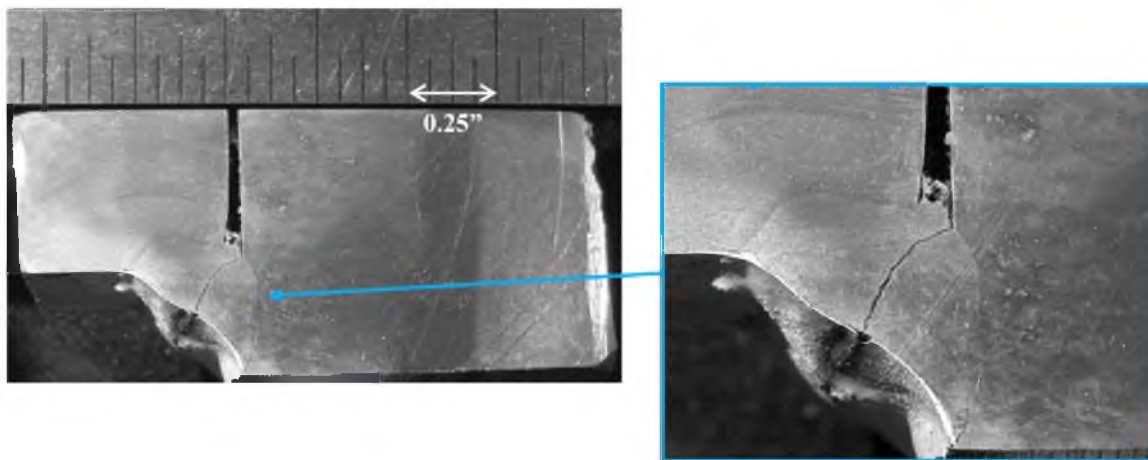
Surface B, left section of crack 3 spoke to rim weld (original at 5X)
